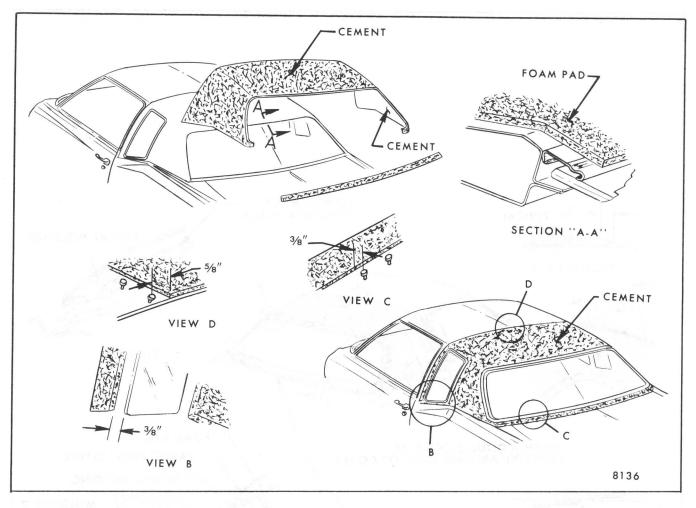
Landau Foam Pad Installation (Two Piece)
